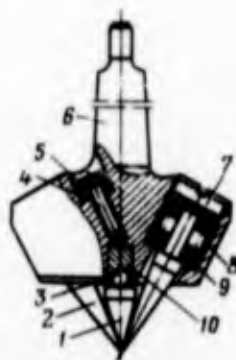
Roller Tool for Rolling of Pipe Tips: 1, cone; 2, roller; 3, ball; 4, screw; 5, nut; 6, body; 7, plug; 8, bushing; 9, radial-thrust ball-bearing; 10, support
